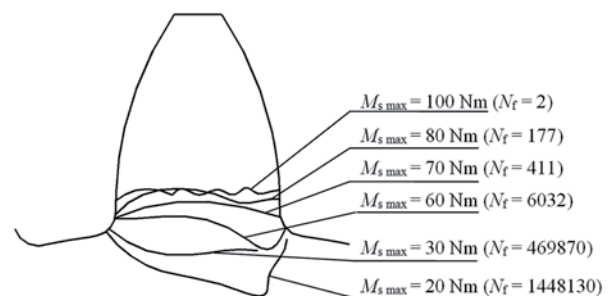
Scheme of trajectories of fatigue cracks at tooth base in gears no. 2 (tab. 3)
